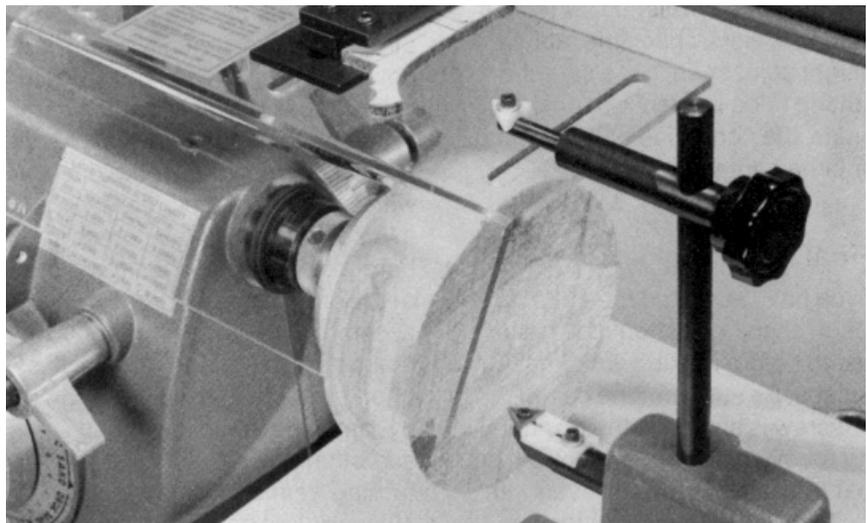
Setup for faceplate turning with the guard extending over the workpiece.
